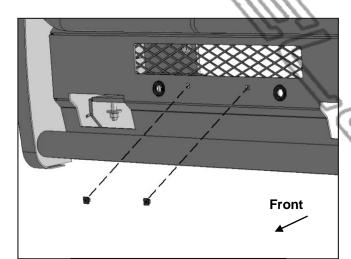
Attach Bumper to inside of Bracket. NOTE: Insert Plastic Washers between Flat Washer and mounting plate on Bumper to minimize corrosion
